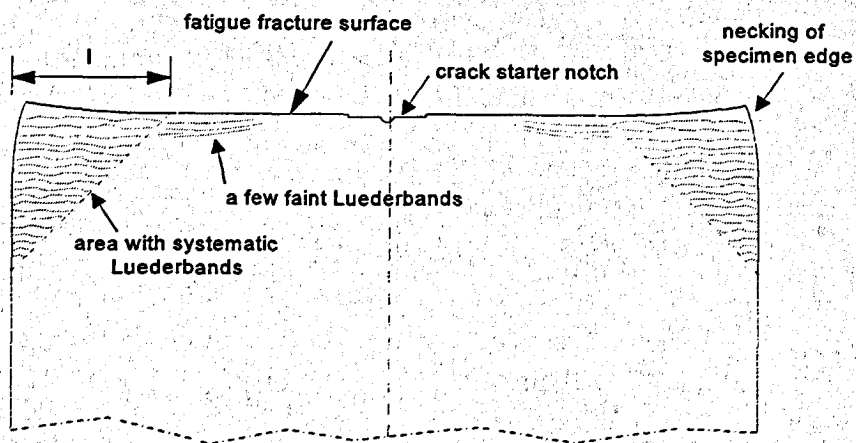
Lüderbands visible on polished surfaces of specimens Steel-3 and Steel-4.
